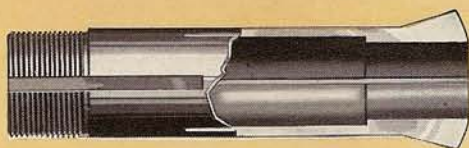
Cross Section of Collet for 9-inch "Workshop" Precision Lathe.
